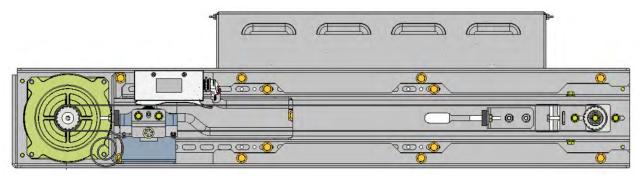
The MONXT-OMNI Linear Door Operator, Left Hand
